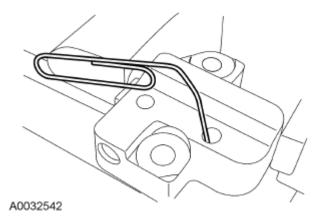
Installing Paper Clip Into Hole In Tensioner Housing Courtesy of FORD MOTOR CO.
